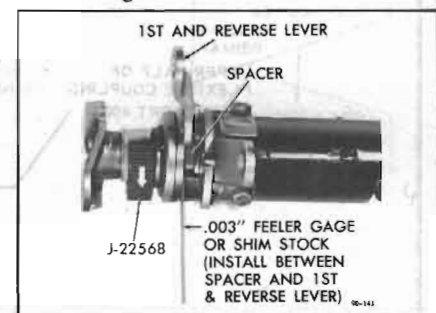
Adjusting Shift Lever Lash at Lower End of Steering Column
